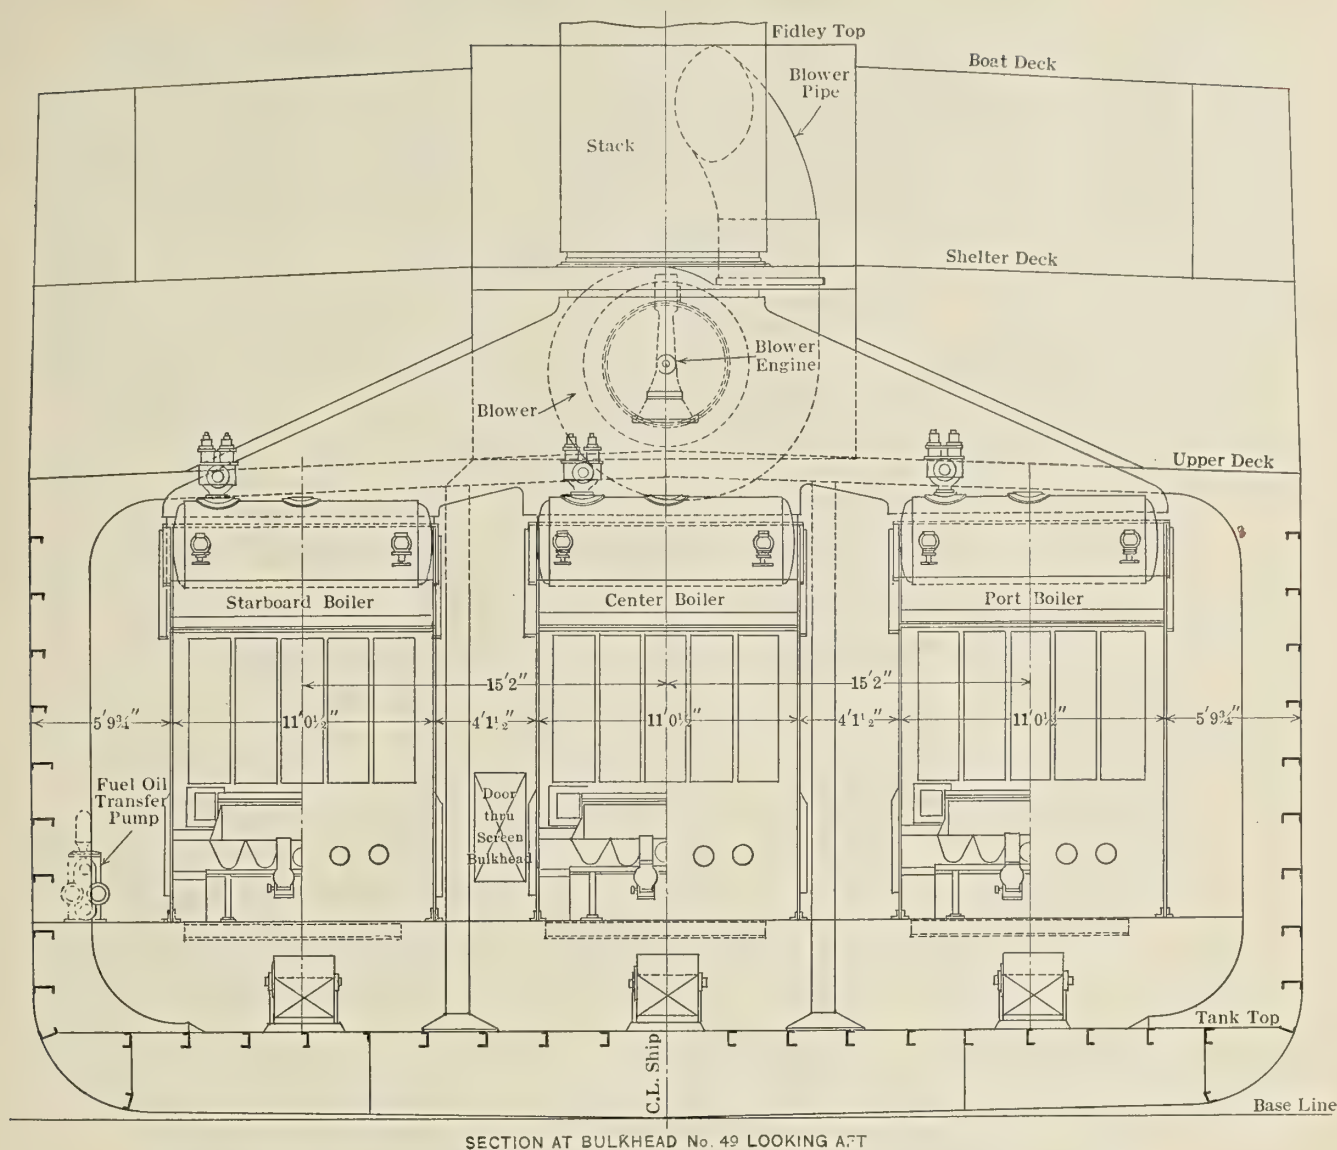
Section Through Boiler Room of Vessel Equipped with Riley Stokers Under Heine Boilers
